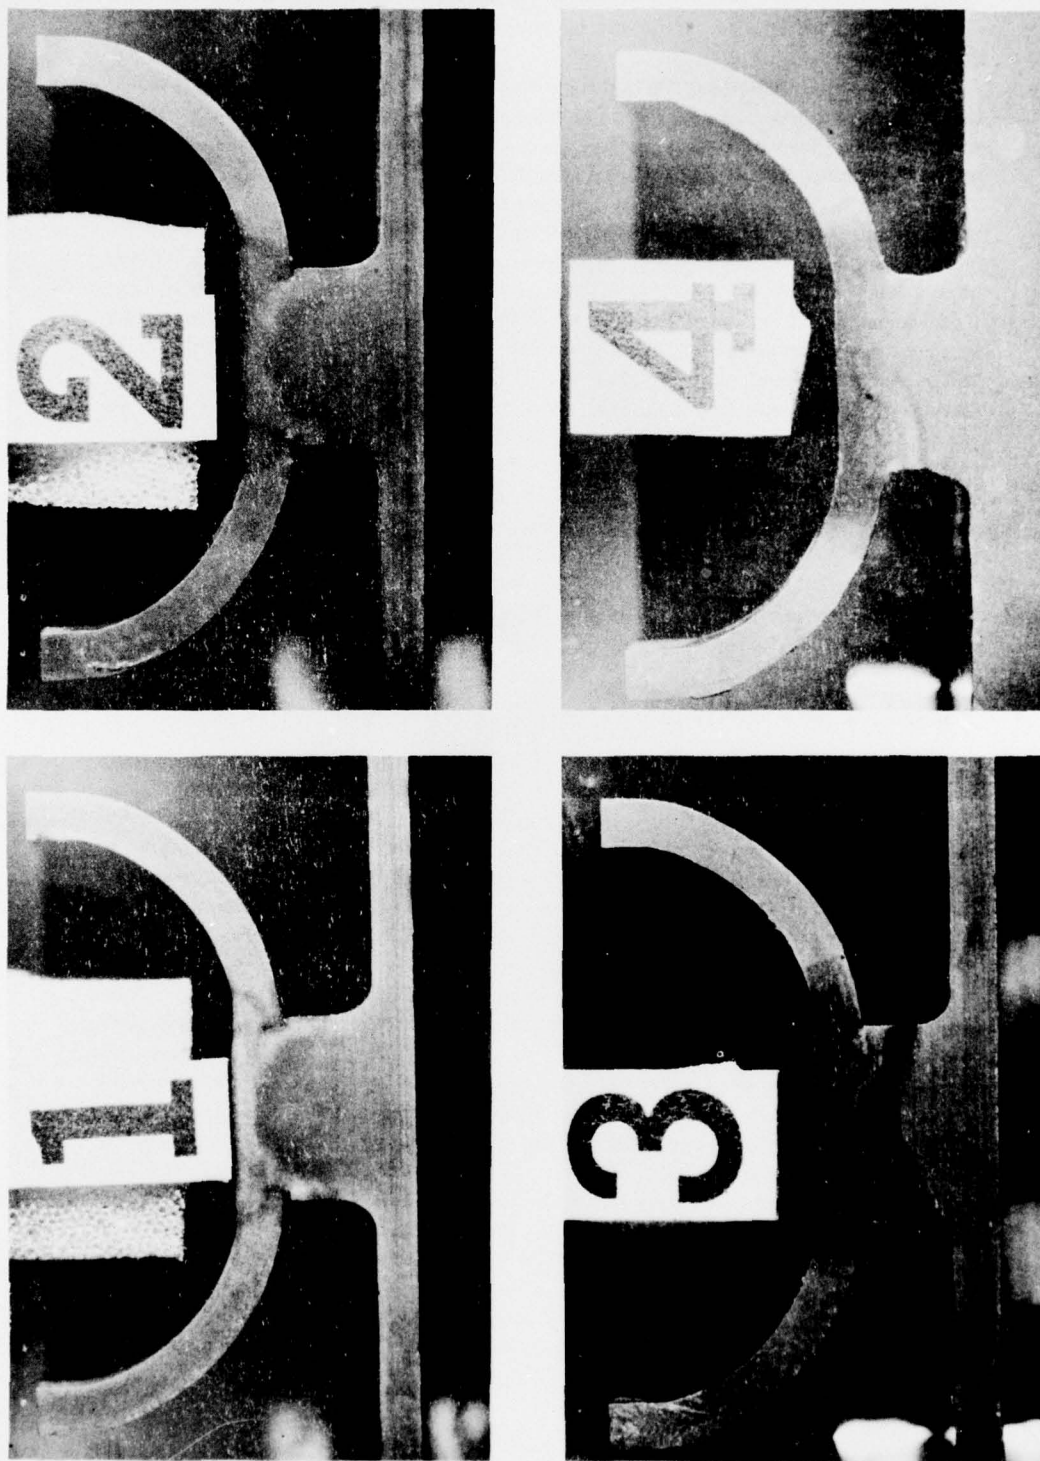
Four views of the steps in research for welding the cup to the plate of the diaphragm.
